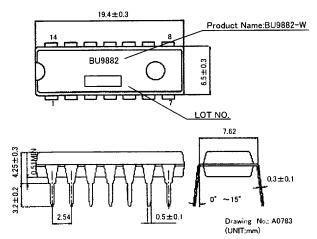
(a) PHYSICAL DIMENSION DIP14 (BU9882-W)
